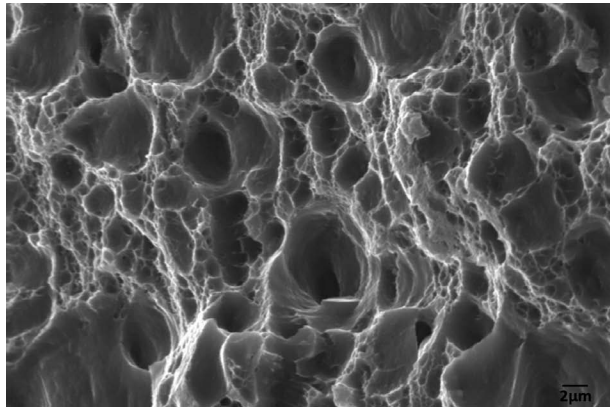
High magnified image of the fracture surface shown in Fig. 212
